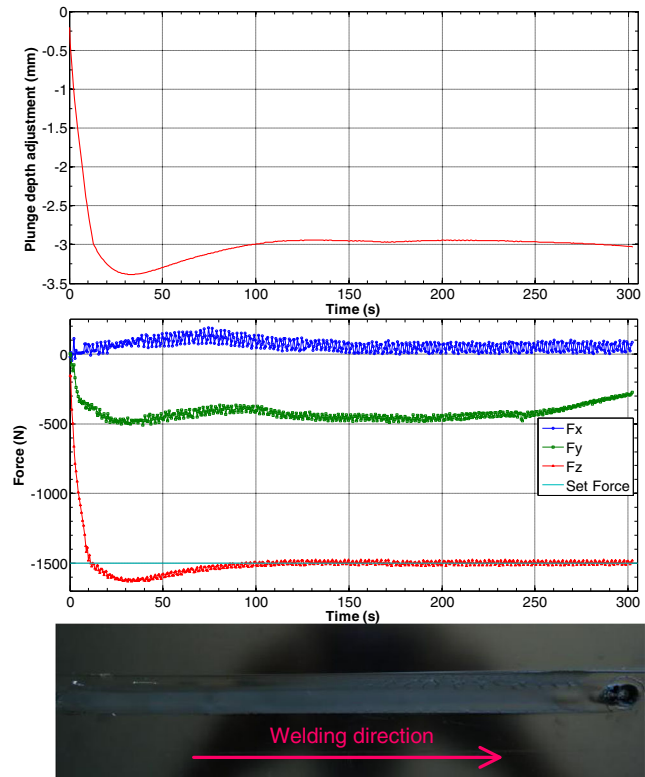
Resulting weld 3: welded seam, measured loads and plunge depth adjustment during robotic FSW process using force/motion control
